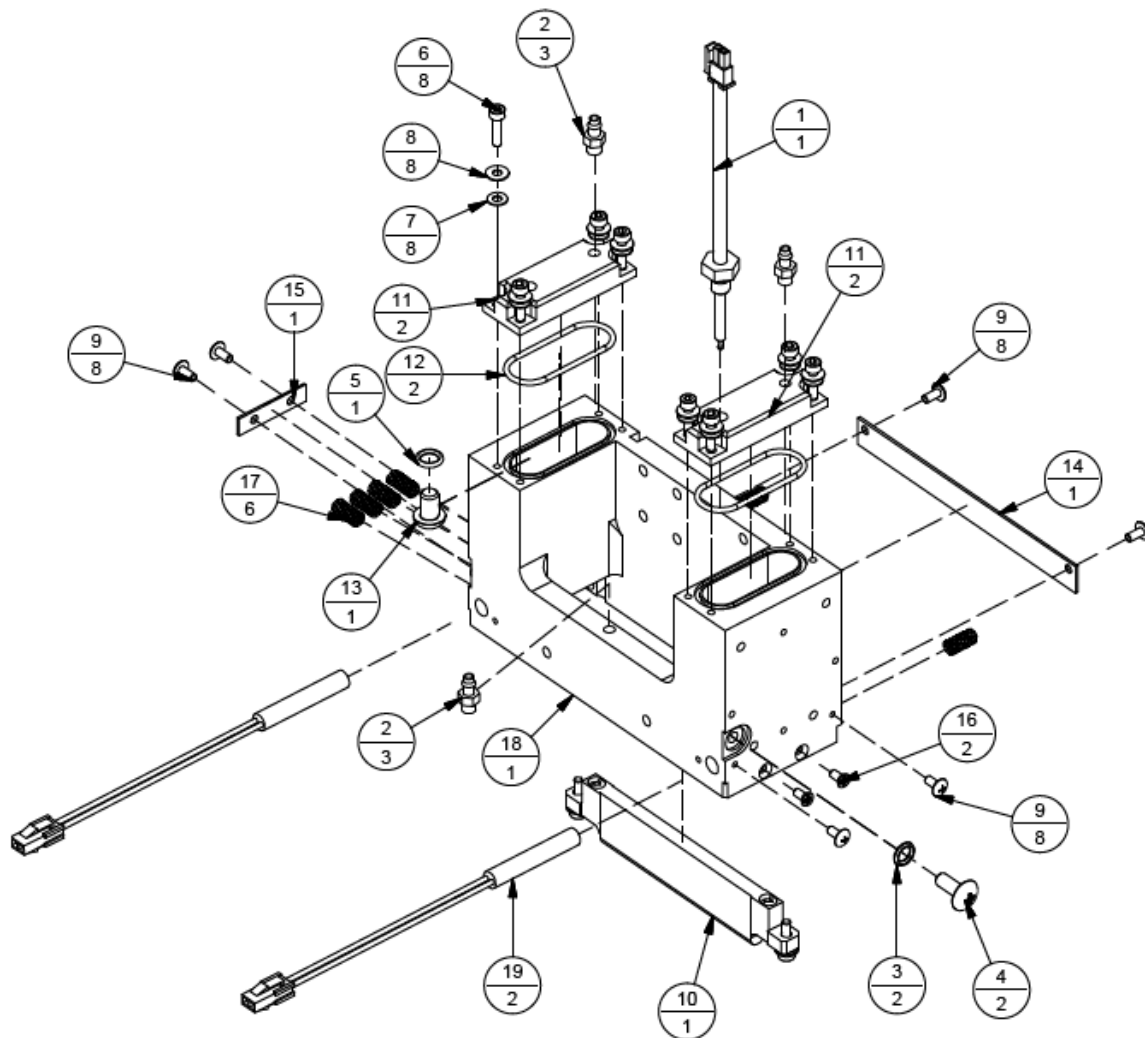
9107438A – Manifold Assembly, Atom 2500
